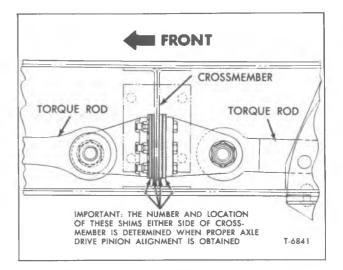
Torque Rods Installed at Frame Crossmember with Shims Installed (Typical)
